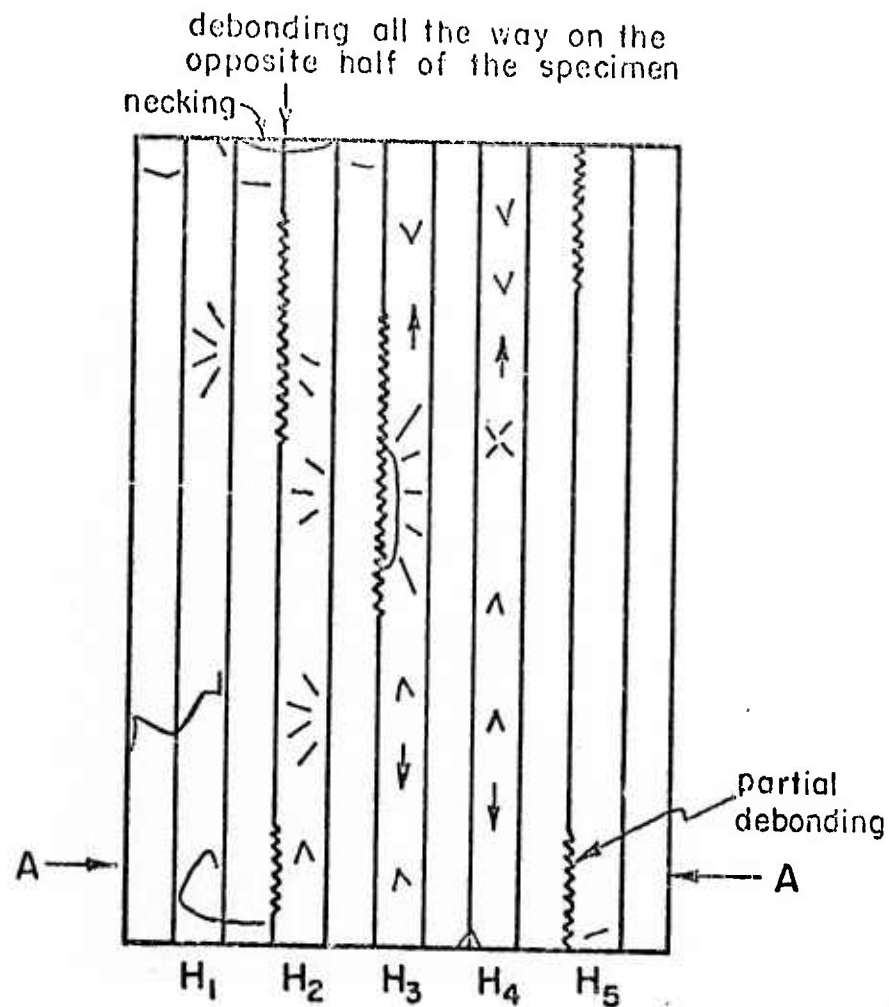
A Schematic Fractograph for Specimen D 312. Except flat brittle fracture in H_2 and H_3 , the shear fracture modes were observed. Some neckings at edge and more partial debonding were observed. Crack originated from either H_1 or H_2 .
